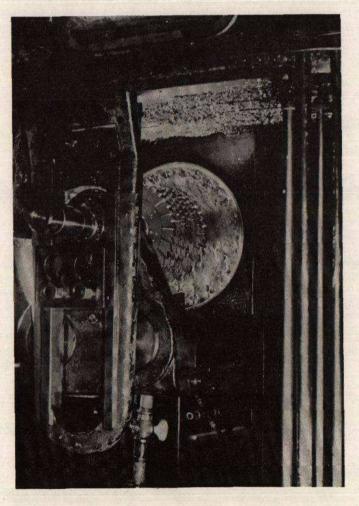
Lead Flywheel Attached to Milling Cutter Shaft to Reduce the Noise
